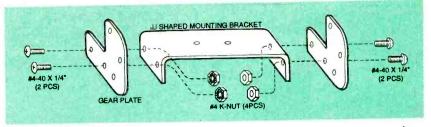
THE MAIN ASSEMBLY that holds the gears and wheels is composed of two side gear plates and one U-shaped bracket. Detailed mechanical drawings can be purchased from the source given in the Parts List.
